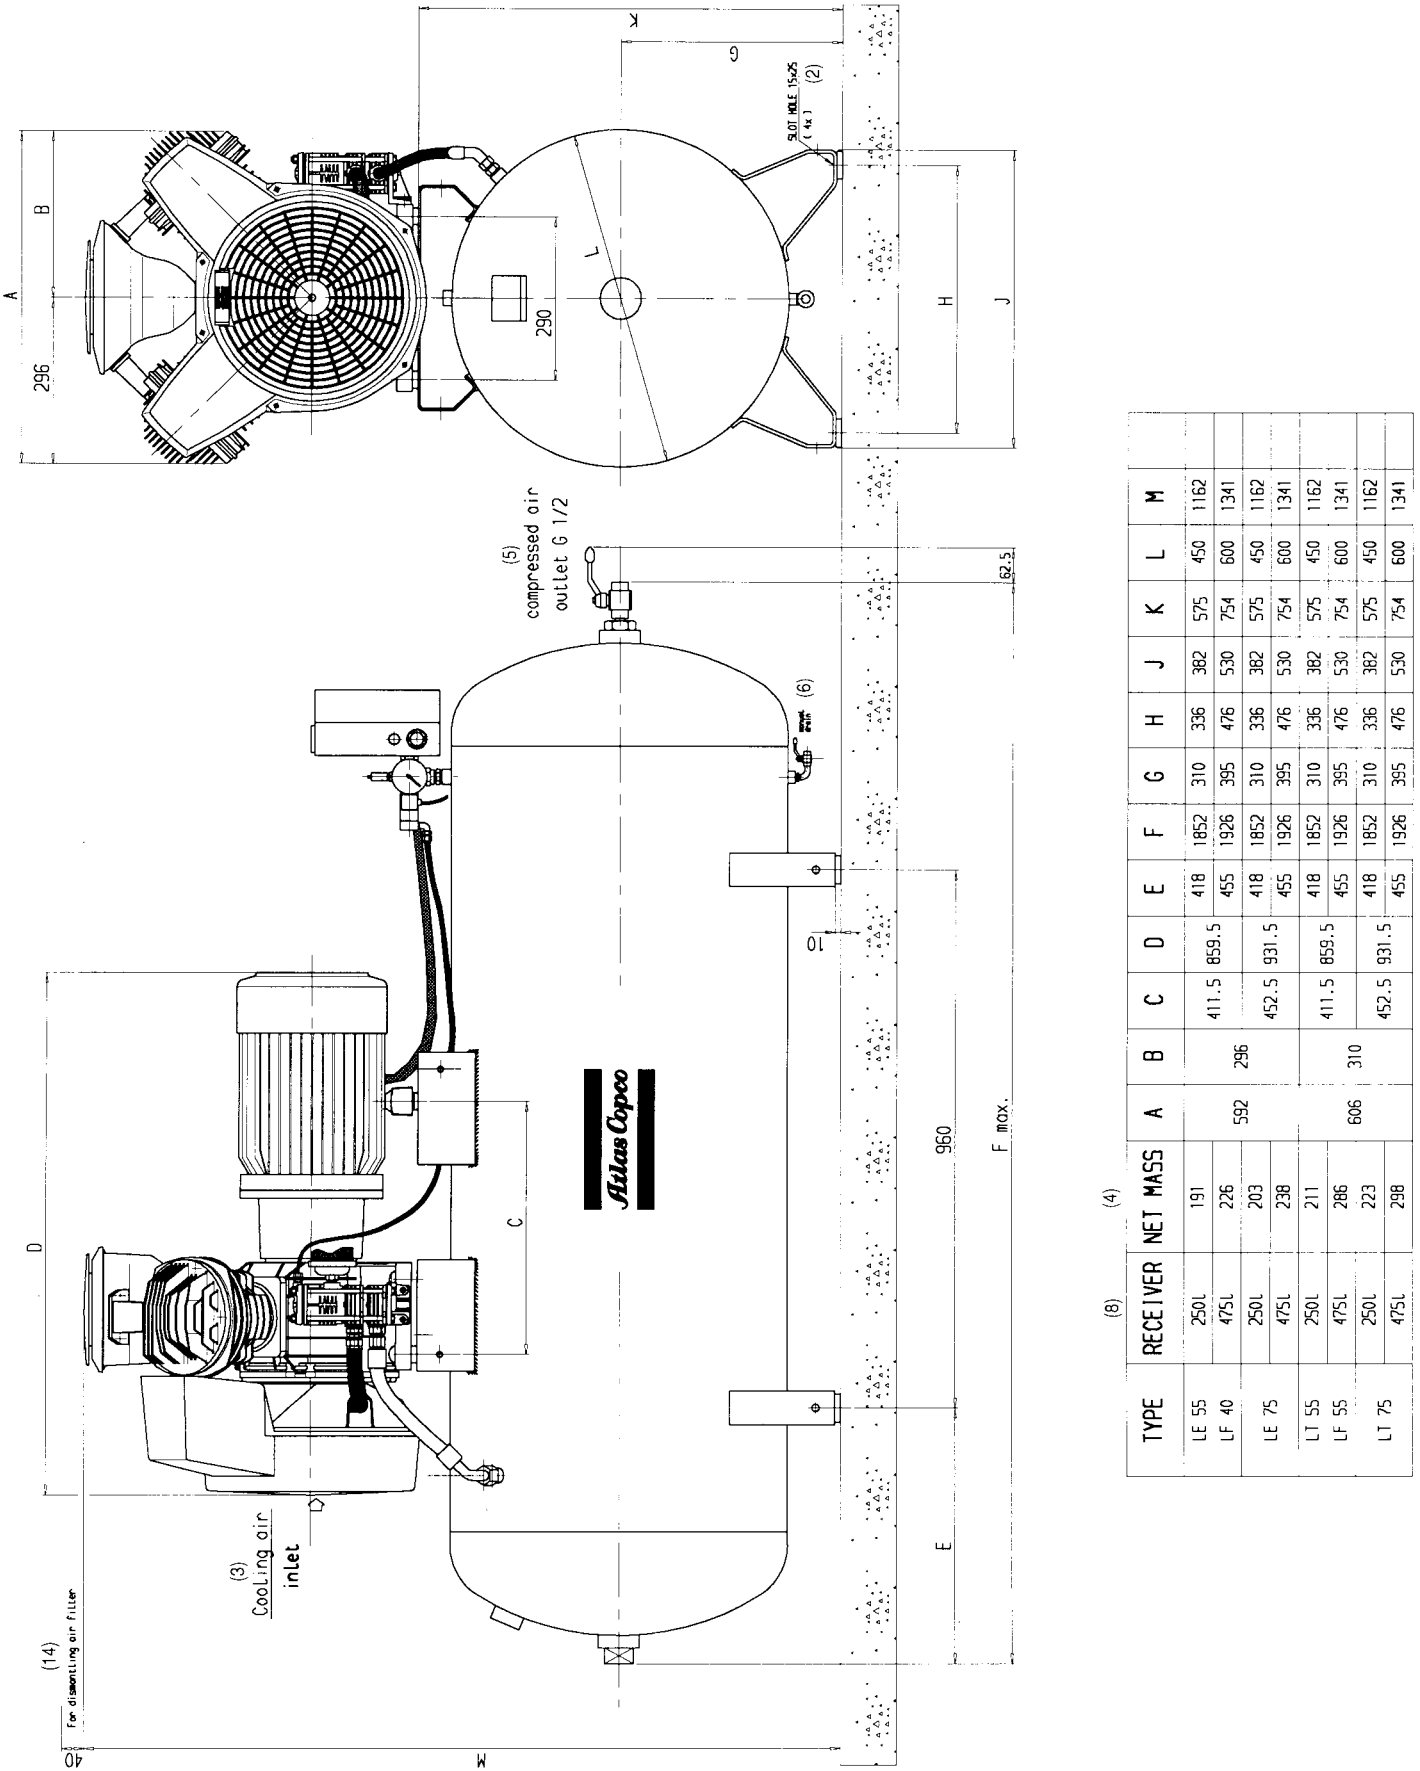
Dimension drawing, LE/LT55/75 and LF40/55 Complete Unit (horizontal 250/475 l receiver)
